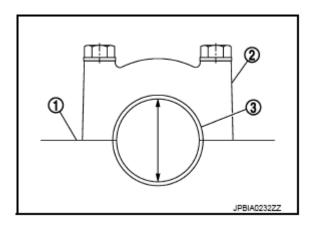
Measuring Inner Diameter Of Main Bearing Using Bore Gauge Courtesy of NISSAN NORTH AMERICA, INC.
